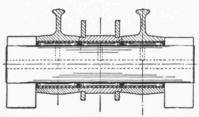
Heavy shock loads are easily handled by the Needle Bearings in this valve rocker arm of a large Diesel engine. Circulating oil lubrication assures a steady supply of lubricant.
